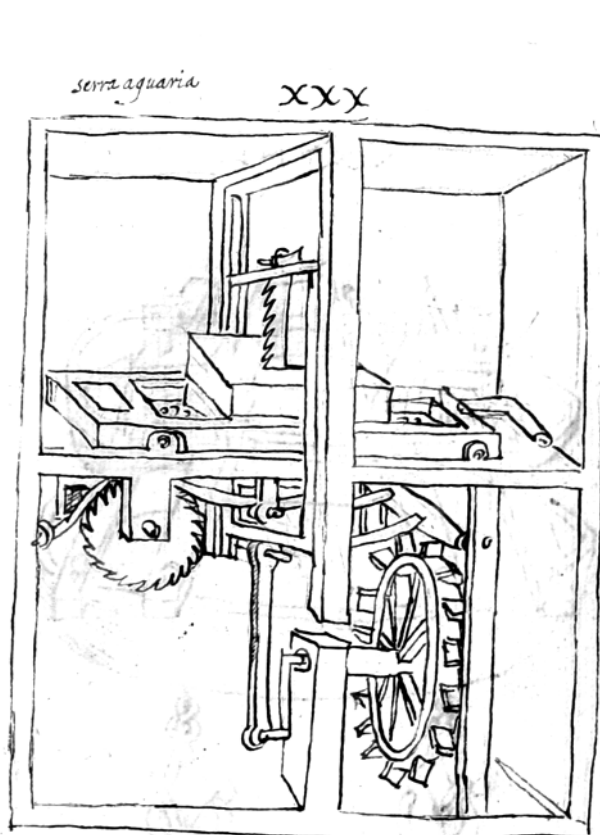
Lumber-cutting machine drawing by Francesco di Giorgio di Martini (15th C.) after Villard de Honnecourt (c. 1225)
